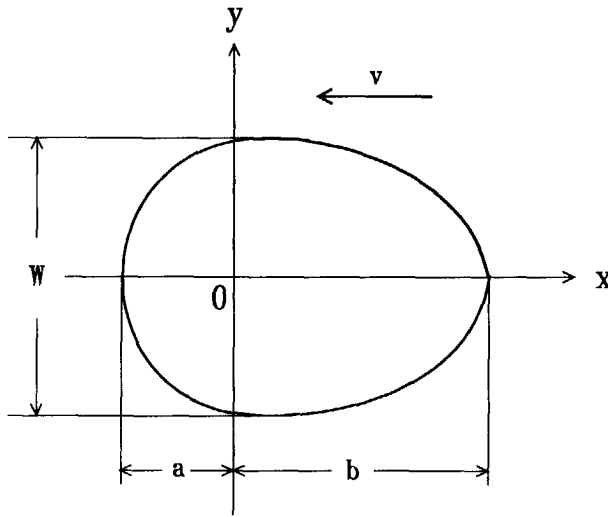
Schematic illustration of weld pool parameters.
